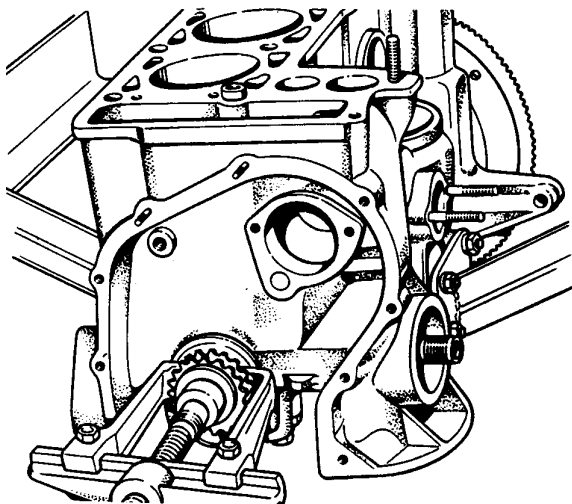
Removing Crankshaft Sprocket with General-Purpose Remover Tool A.40005/1/7
